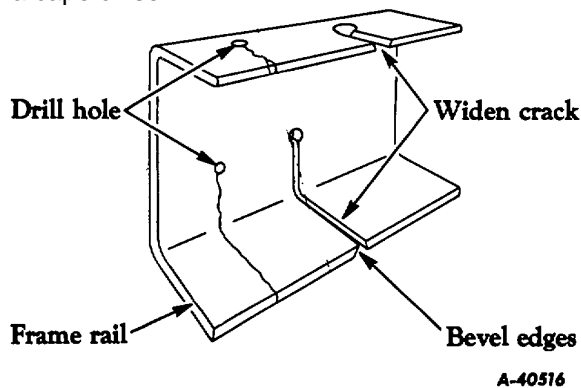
Showing Method of Drilling Frame Rail to Stop Progress of Crack. Also shows Method of Preparing Crack for Welding.
